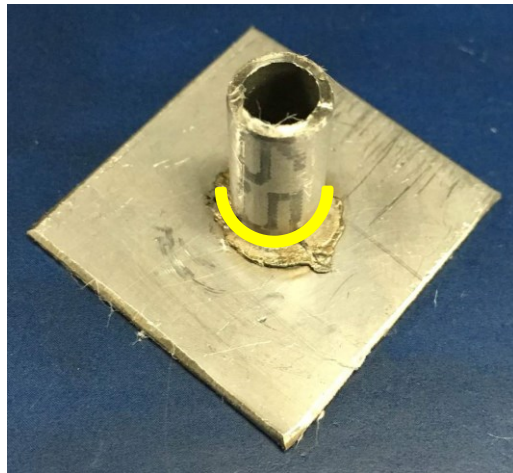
Appearance specimen after welding cross section observation method in the plane direction
